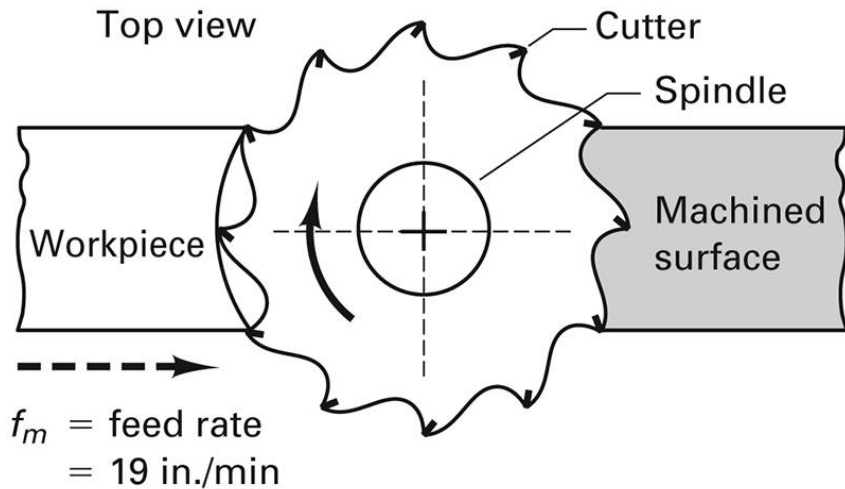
Face milling viewed from above with vertical spindle-machine.
